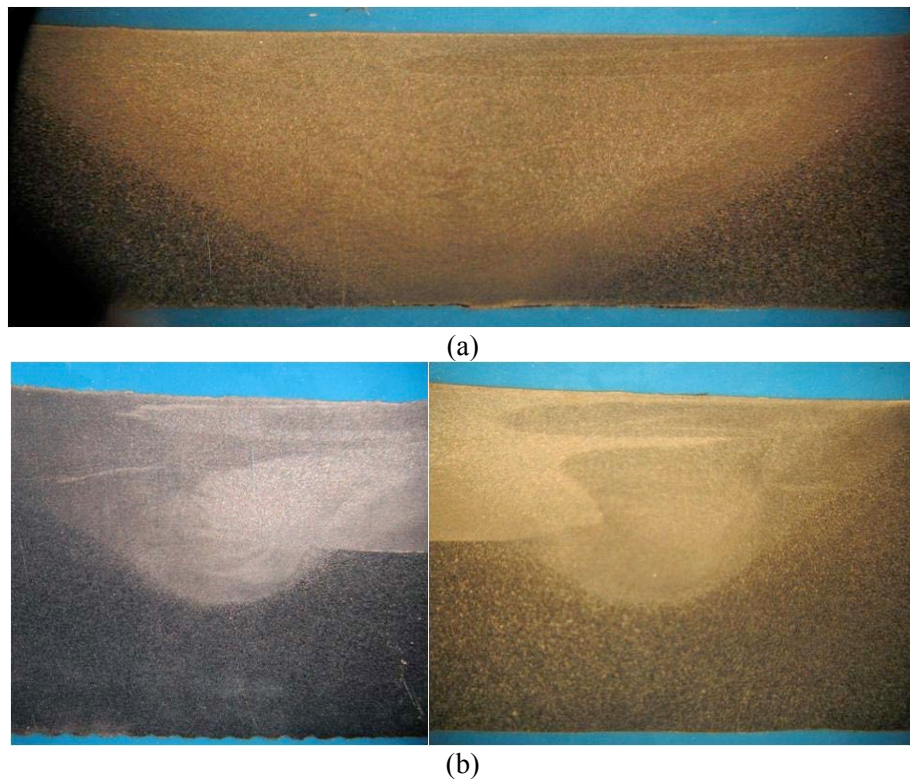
Multi-pass, multi-layered FSW approach for welding thick-sectioned materials.
